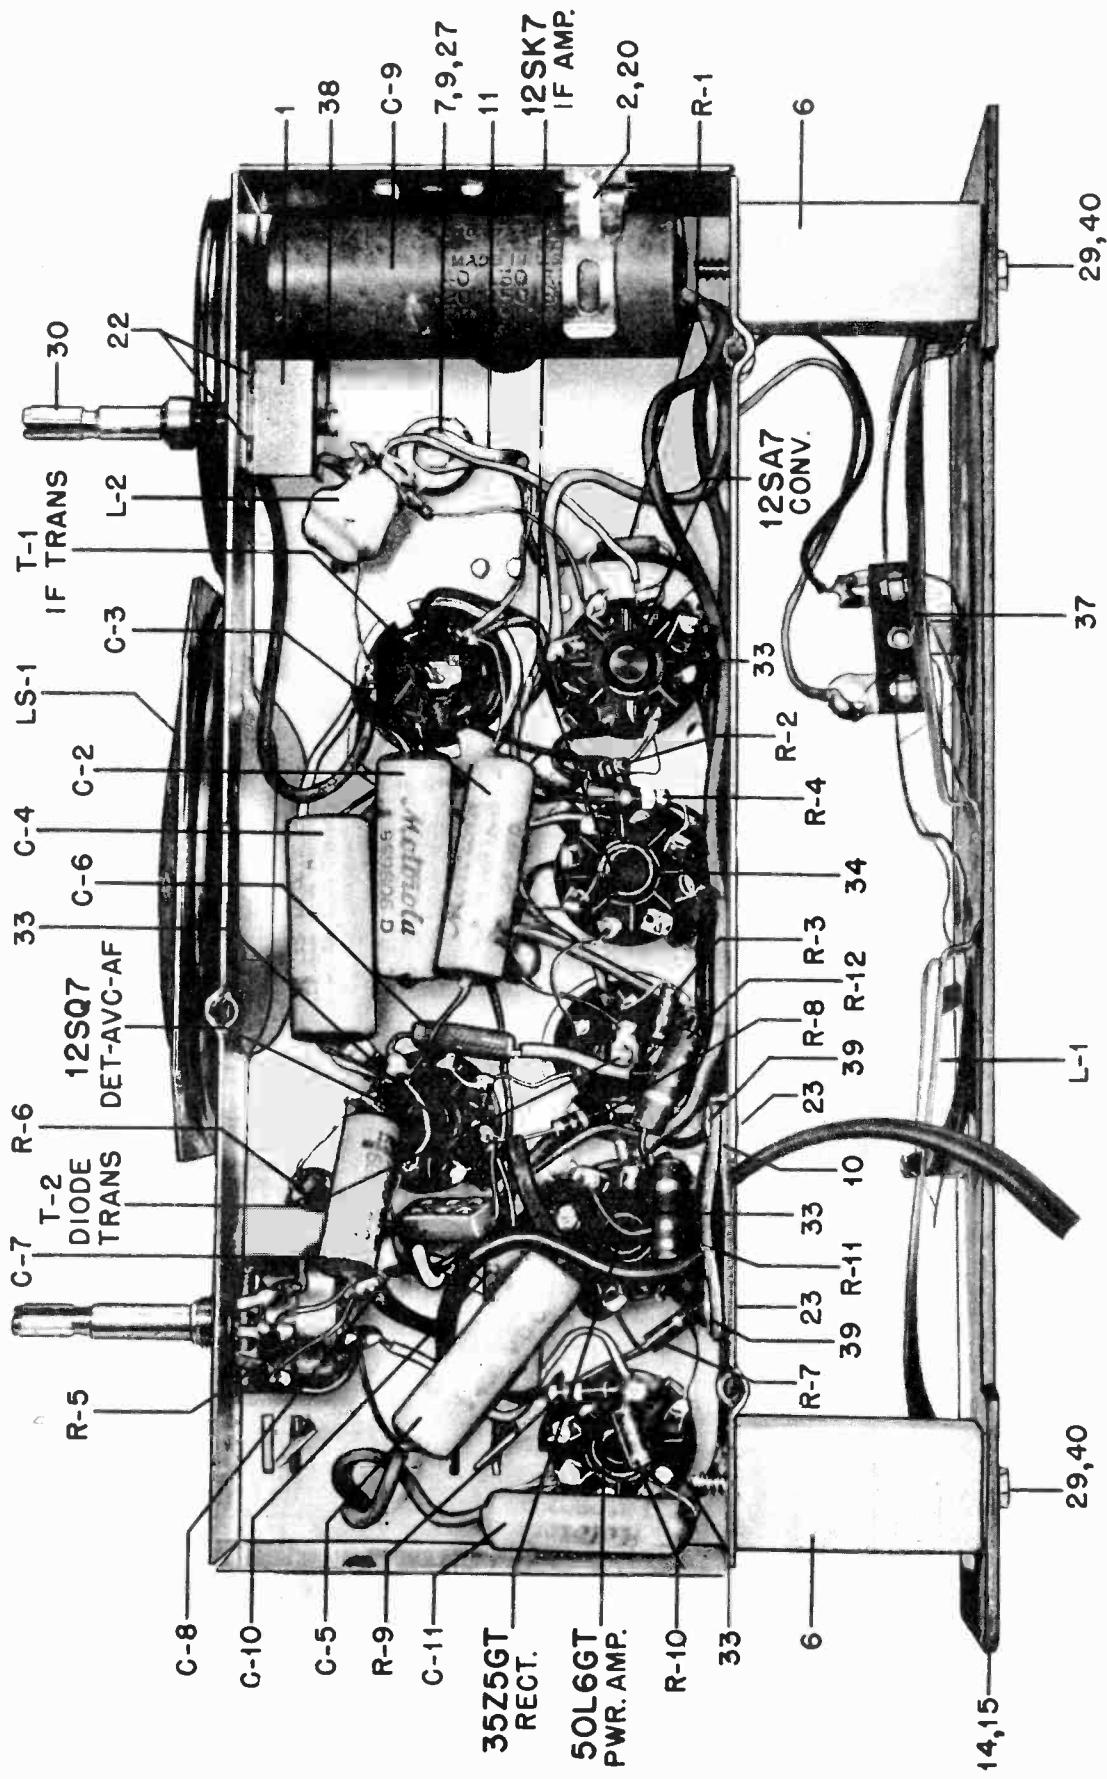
CHASSIS HS-125 PARTS LOCATION - BOTTOM VIEW
